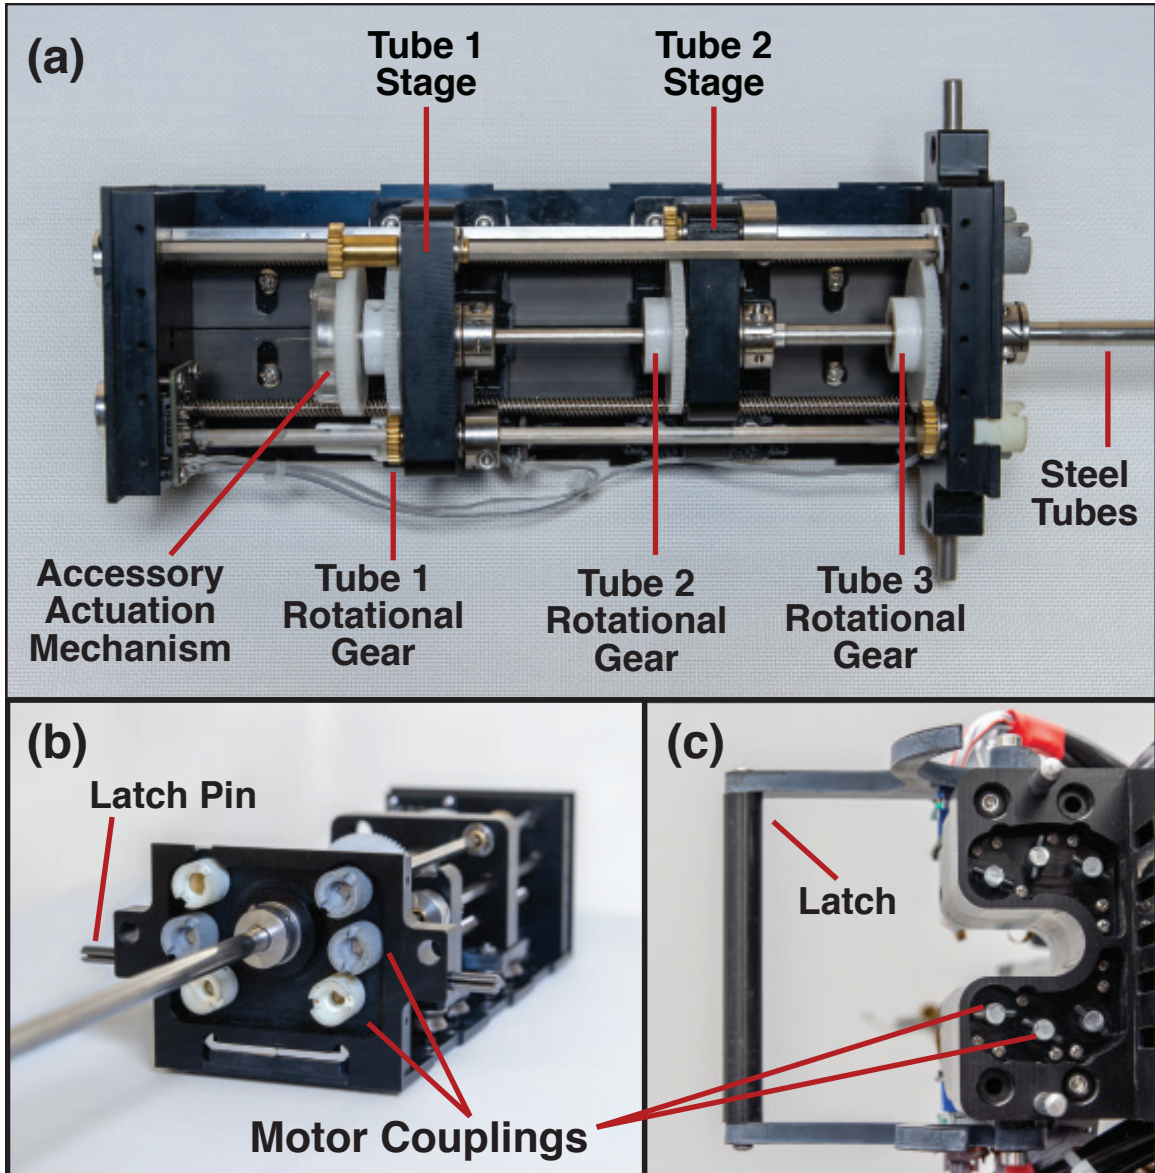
The tool cartridge design. (a) The internal components of the tool cartridge which translate and rotate the tubes, (b) The end of the tool cartridge with coupling elements that mate to the robot actuation unit, and (c) The portion of the actuation unit which mates to the tool cartridges via spring-loaded couplings.
